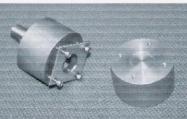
| Components of the grip system manufactured for fatigue test samples: on the left a stainless-steel disk with a mobile slide on board (bottom grip) is shown; on the right two grips shaped like a cylinder (top grip) are displayed.
